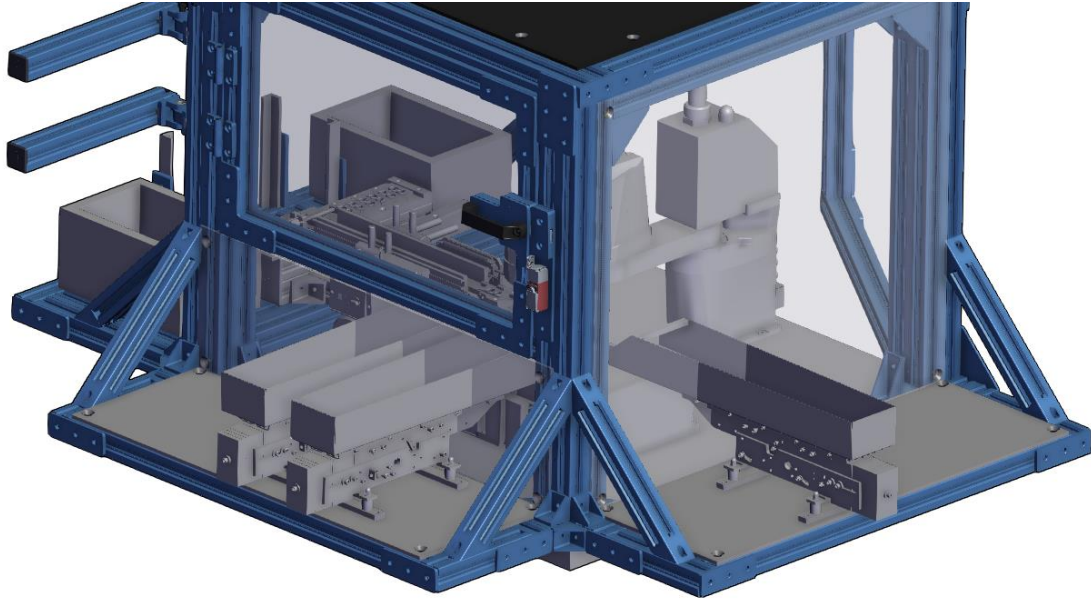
Automated Assembly Cell Bulk Loading Hopper Shelf Designs
